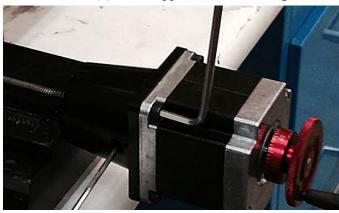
Remove the screws with a 9/64" Allen wrench.
